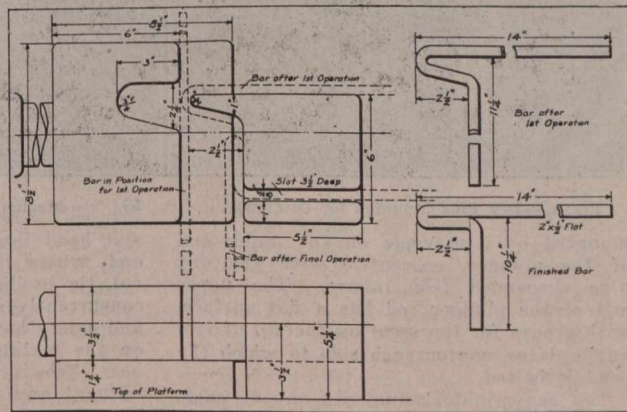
Box Car Corner Bracket Forming Blocks.
